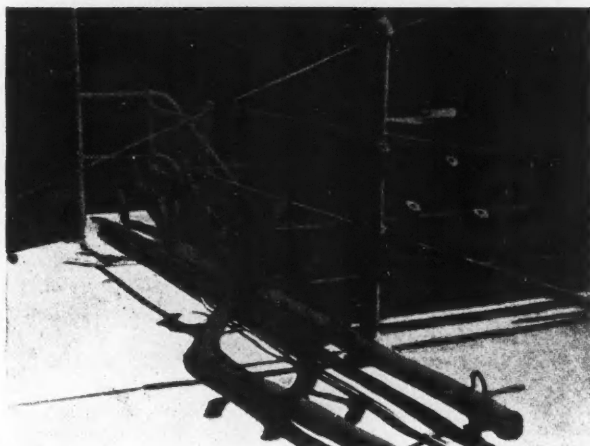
Assembly of 4-Nozzle Spray Group.
